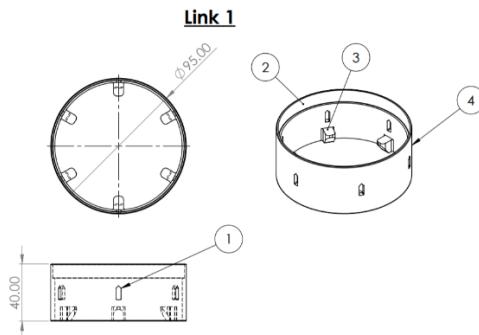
Magnetic interface concept implementation: Link 1 mechanical drawings
